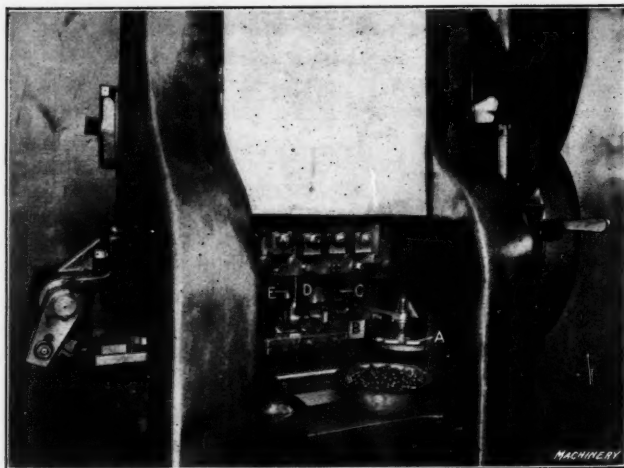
A Progressive Punch Press Operation—Flattening and Bending the Wing Nut
